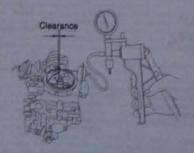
Checking the choke breaker diaphragm clearance - Aisan
